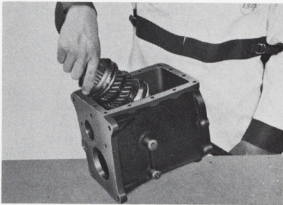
Installing Output V1286 Shaft & Gear Assembly
